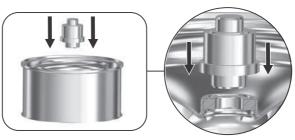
Pressing out the bush (47c) and retaining ring (47d) with service tool K
